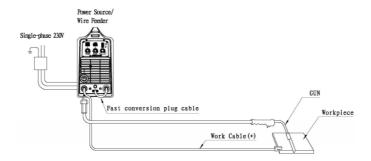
Installation - FCAW welding with wire push type torch
